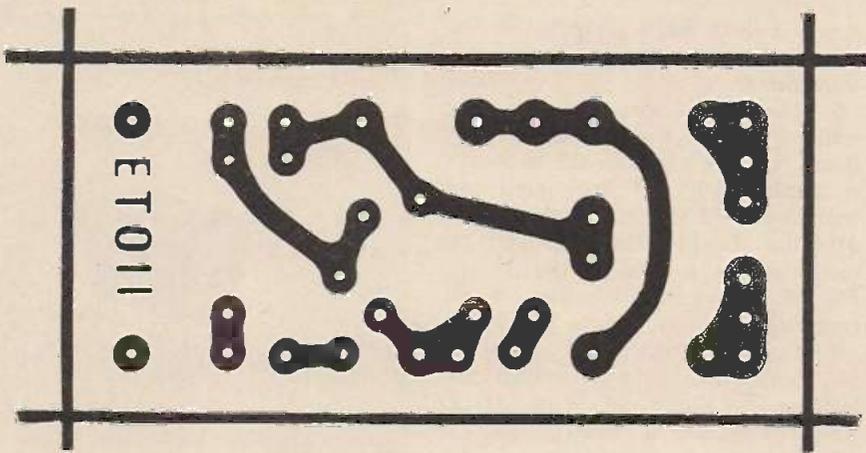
Foil pattern of the printed circuit board. Note that this is shown here exactly twice full size.
